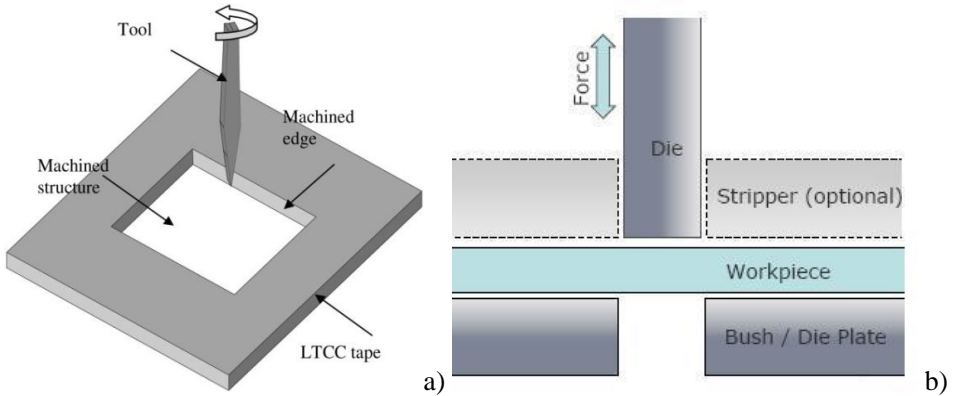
Principles of mechanical milling (a) and punching (b) [7,8].
